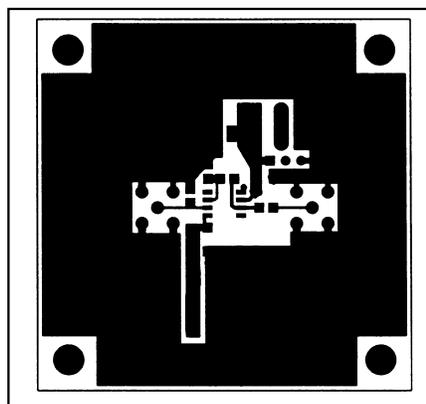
SO-8 High-Speed EV Board Layout—Component Side
